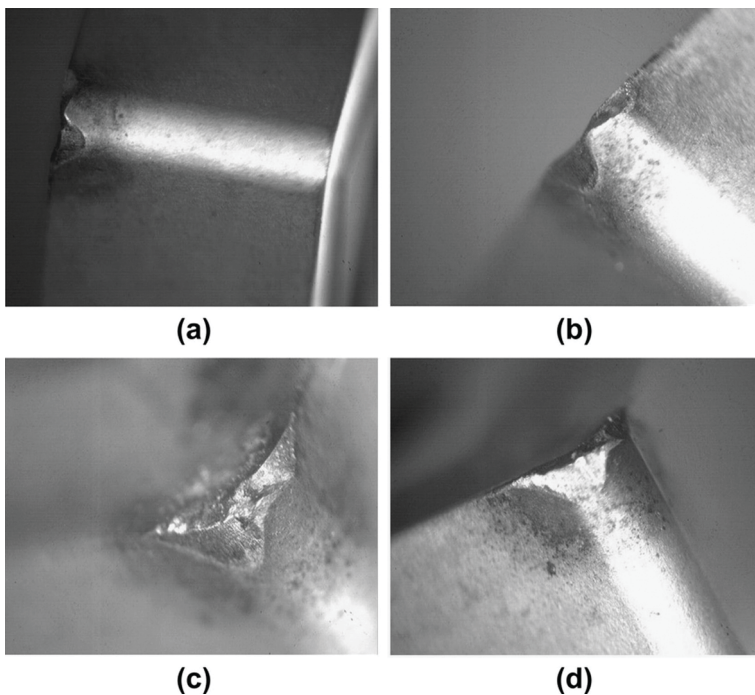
Tool tips of uncoated carbide insert after machining times (a) 0.46 min, (b) 0.66 min, (c) 0.9 min and (d) 1.77 min. (From Ref. [14].)
